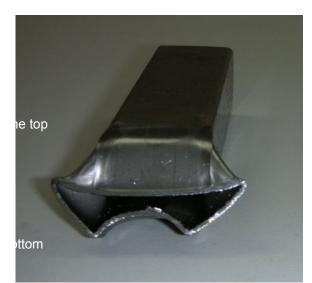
Cross sectional (front) view of the tube after three points bending test through experiment (outer dimension = 25mm, length = 200mm)
